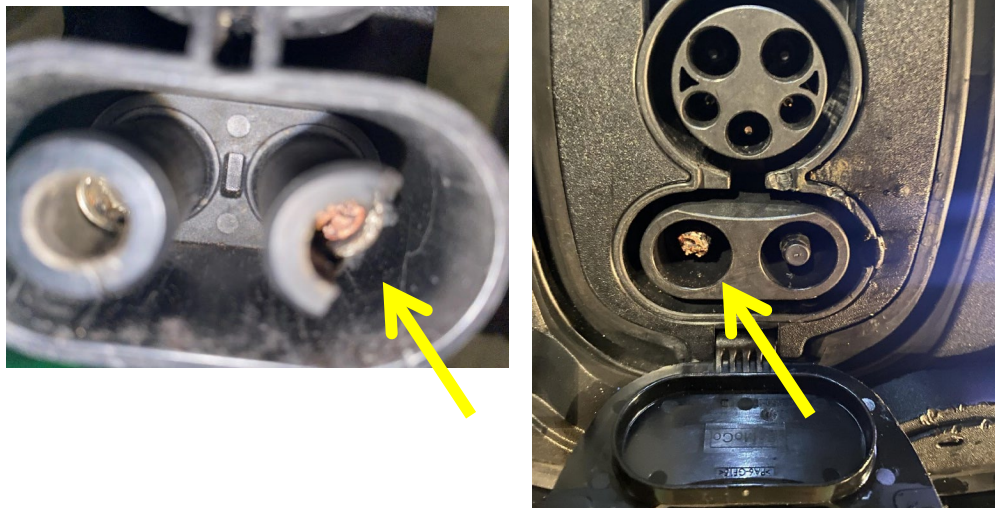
Damage to EVSE connector and vehicle inlet caused due to arcing and welding of the DC+ pin. (User provided image, posted online at <https://imgur.com/a/cE1rRgN>)
